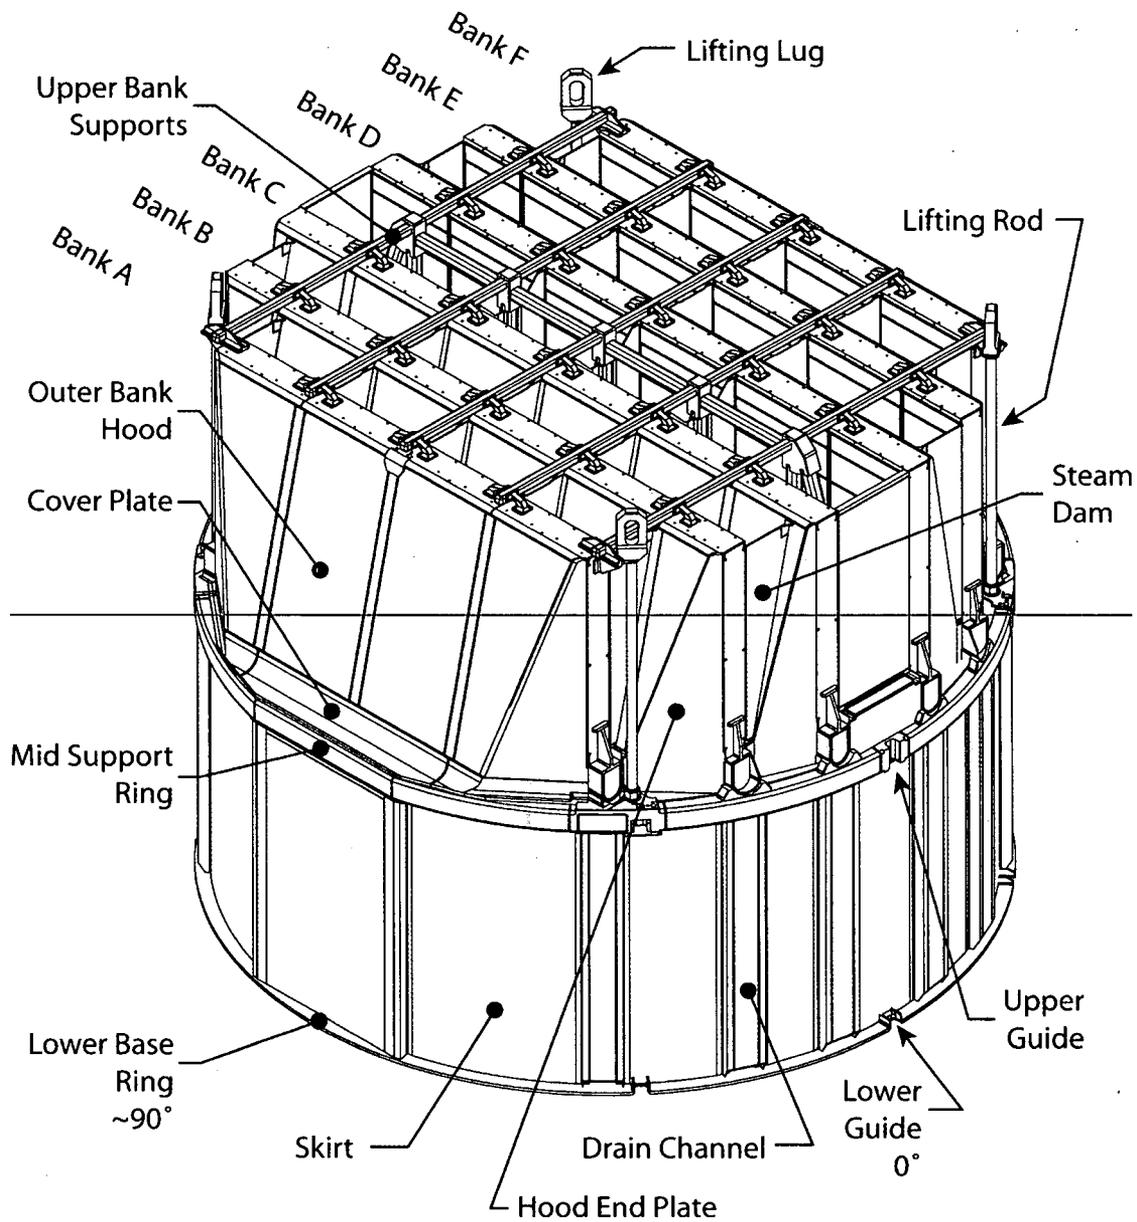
L-2. Typical ESBWR Steam Dryer Assembly
